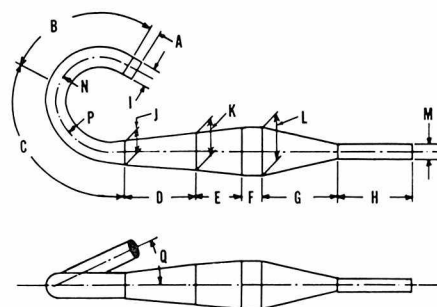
Drawing of expansion chamber suggested. Refer to text for dimensions.
